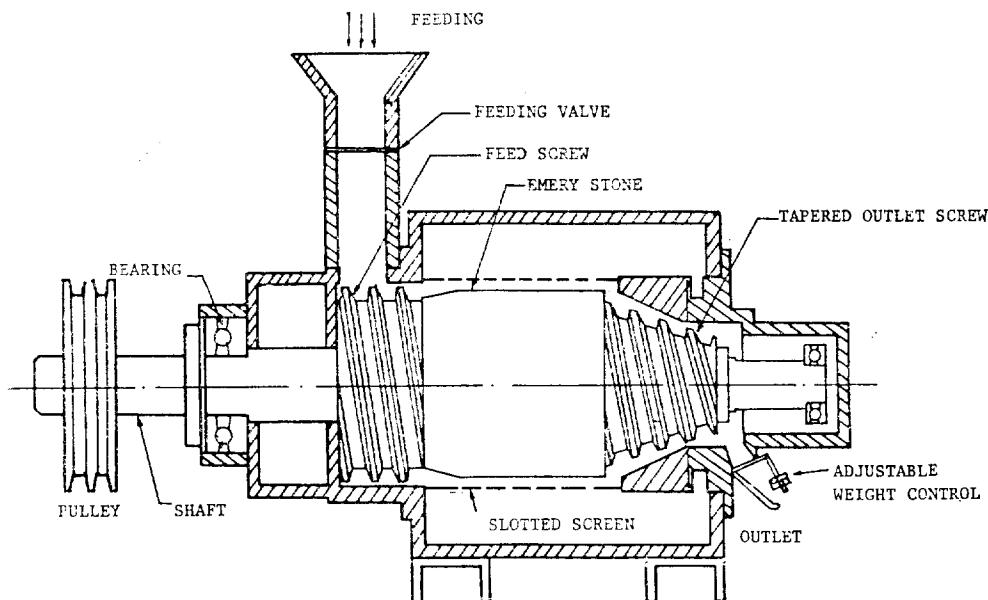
Schematic drawing of abrasive type whitening machine used for experiment
